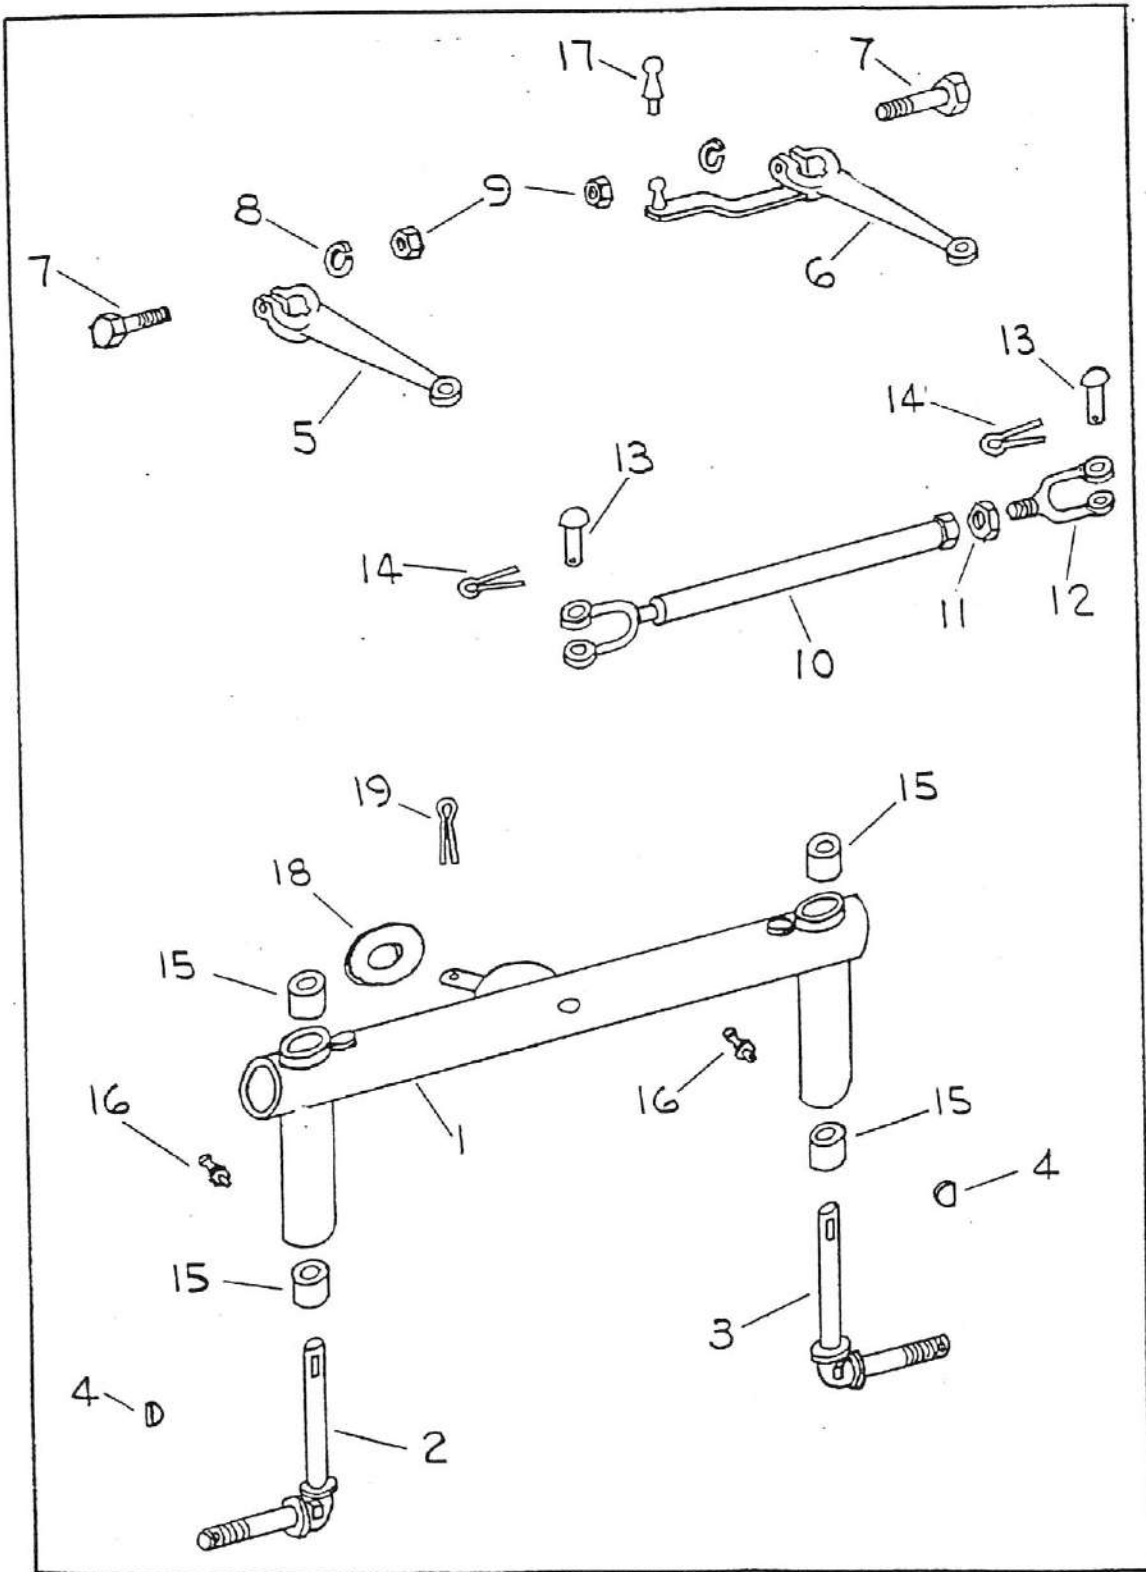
Fixed Front Axle & Tie Rod Assembly
